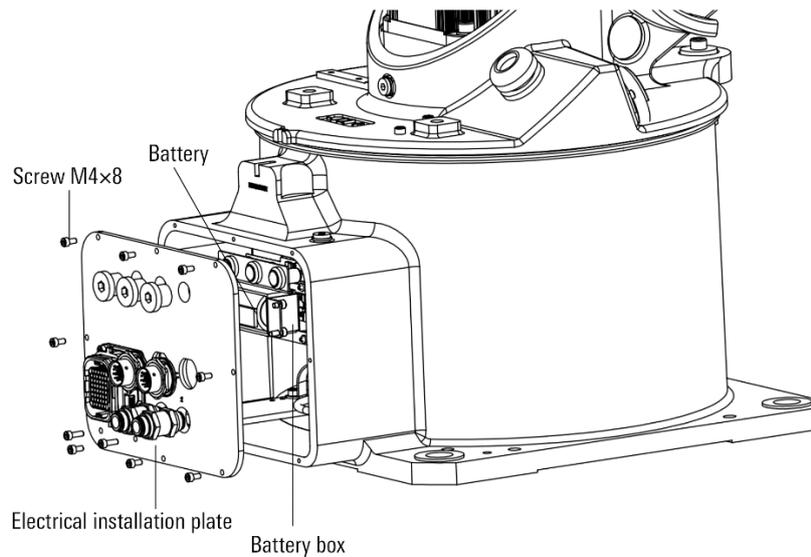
Electrical installation panel of small and heavy load disassembly manipulator
